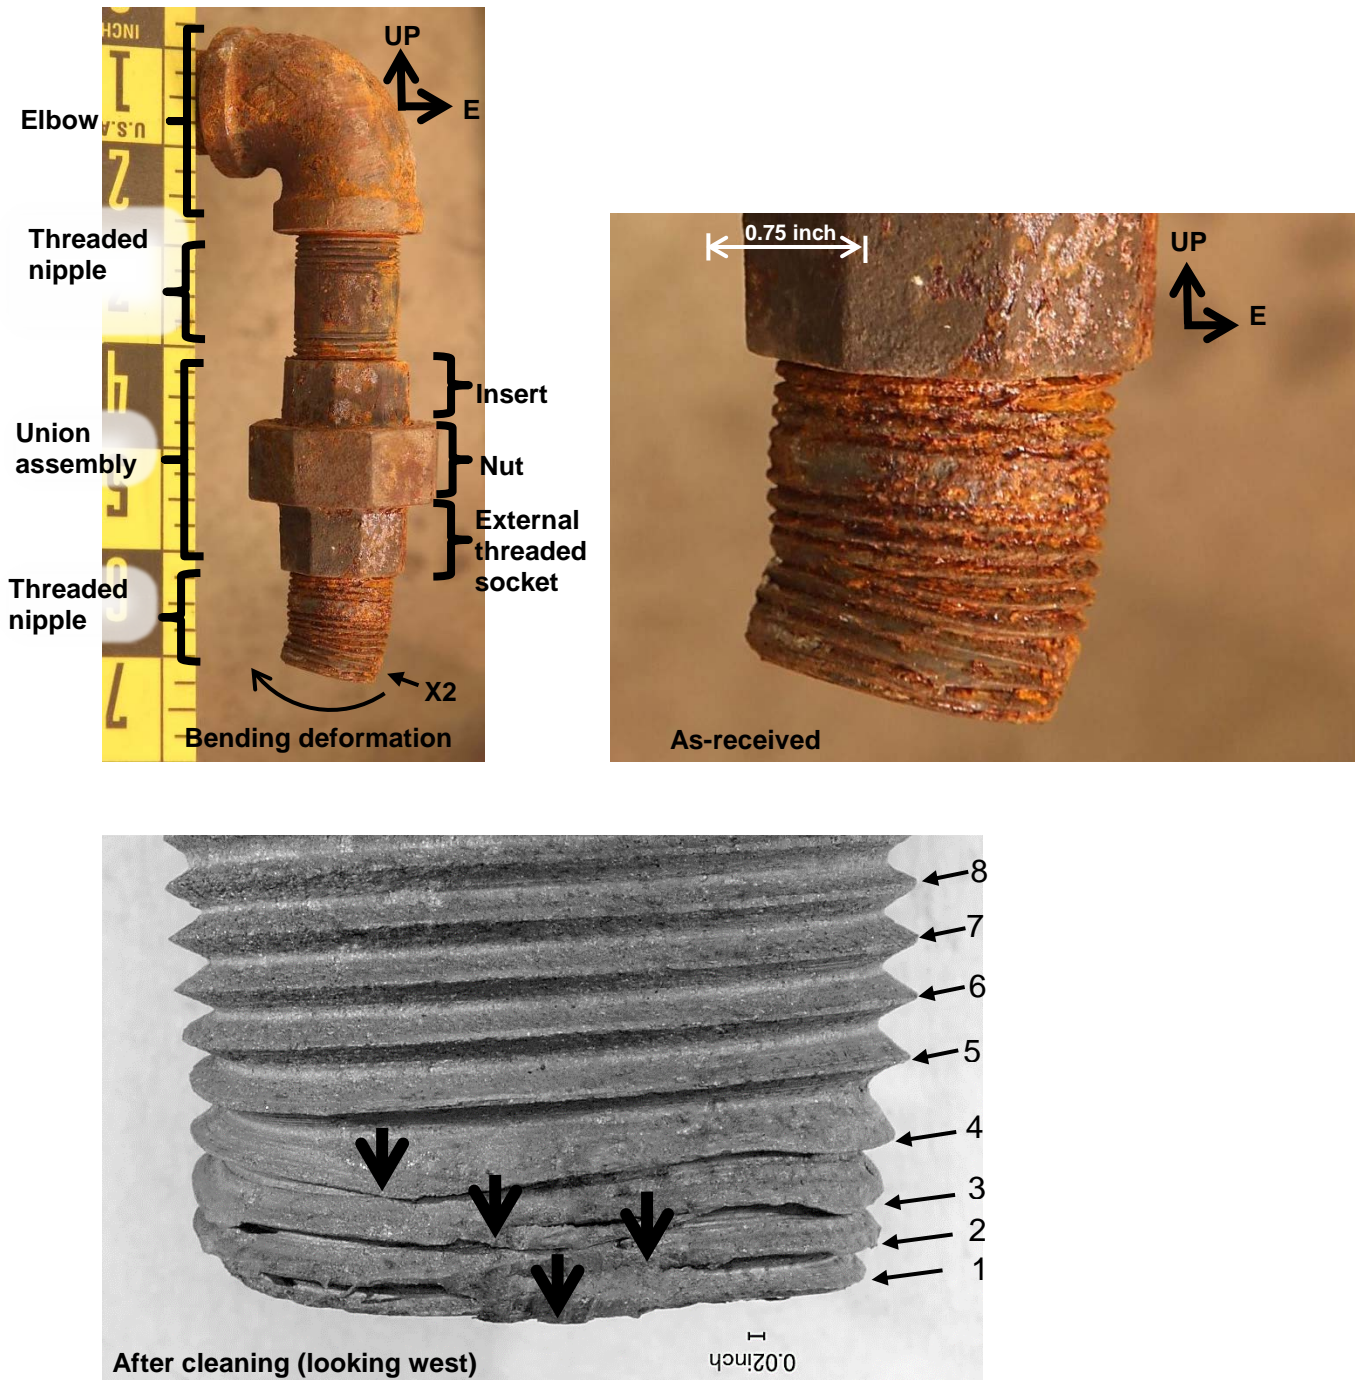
View of the exposed external threaded pipe that separated from the vent port for the upper regulator assembly. The mating internal threads are shown in figure 12. Crown portion of the first eight threads were randomly numbered “1” through “8”. For the purpose of this report, thread “1” is the first engaging thread. Bending deformation was found on the first four threads in the areas indicated by unmarked arrows, and also in the direction indicated by the respective arrows. For the purpose of this report, thread “1” is the first engaging thread.
